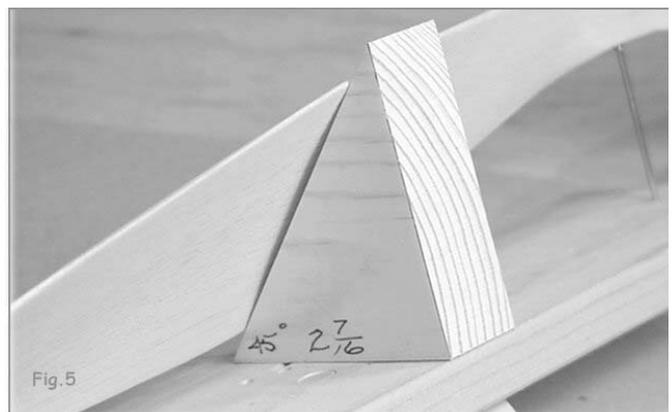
Blade alignment jig to use with the Fixture of Fig. 4
